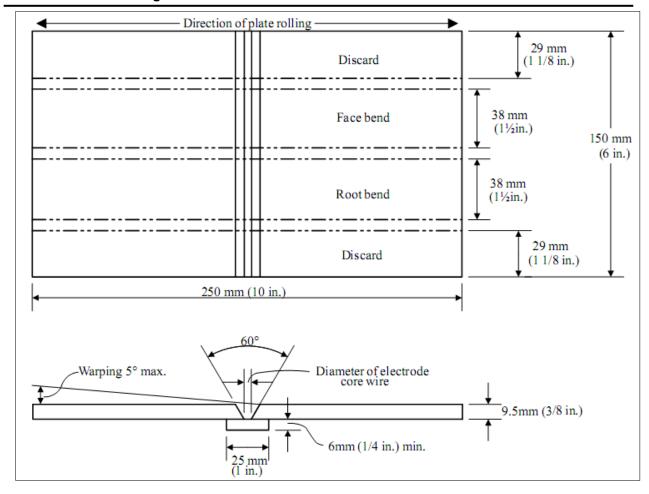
Welder Qualification Test No. Q1 For Plate Material 19.0 mm (3/4 in.) or less
